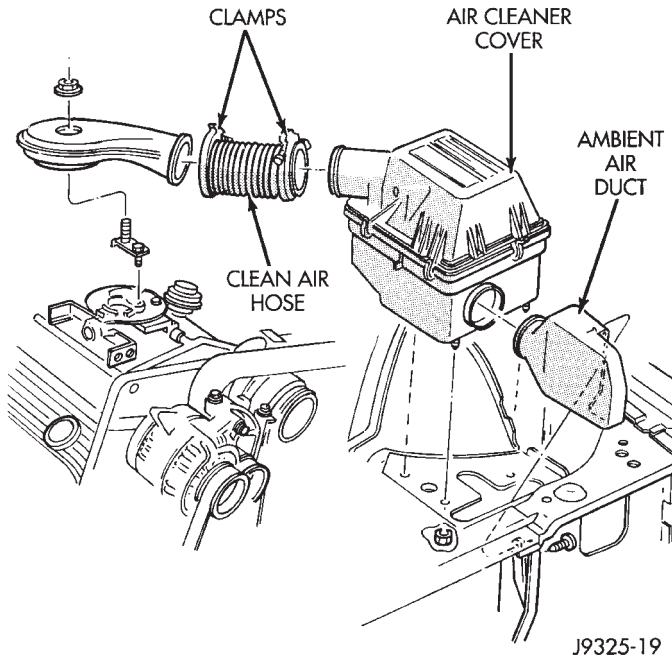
Air Cleaner—5.2L V-8 Engine Shown
